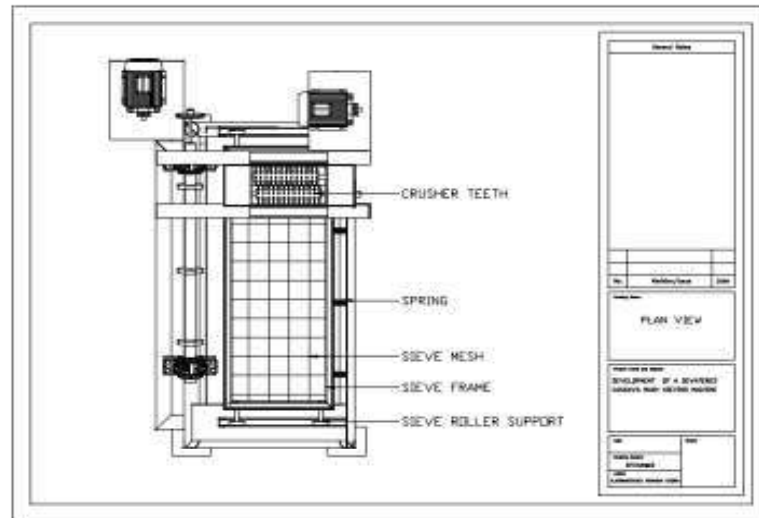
Plan View of Dewatered Cassava Mash Sifting Machine
